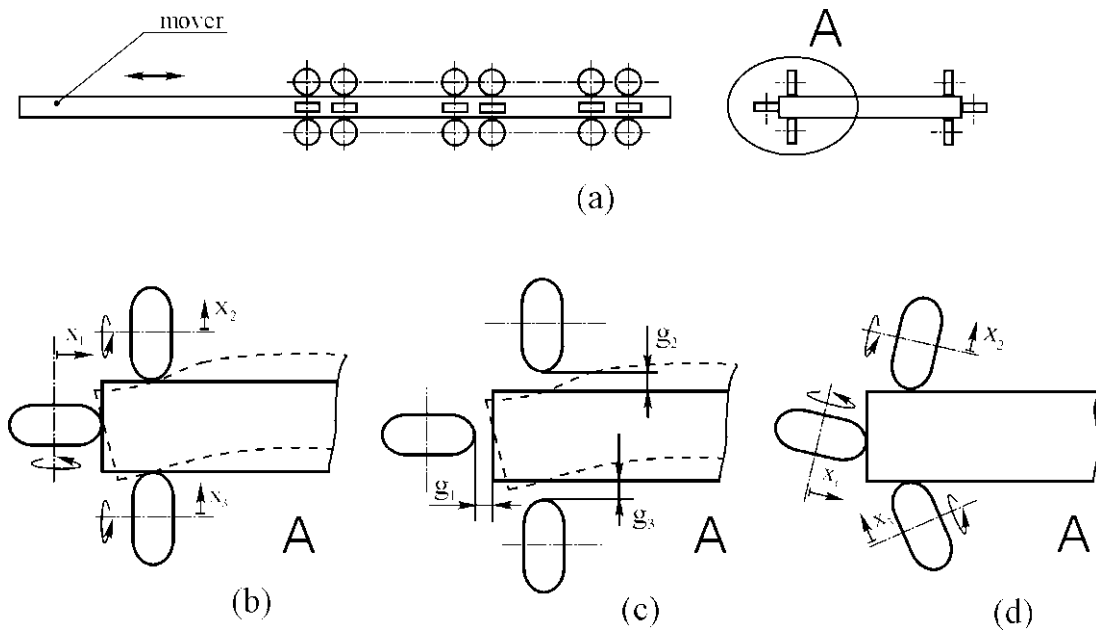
(a) Mover and cam follower bearings, (b) rectilinear degrees of freedom x_1 , x_2 , and x_3 of three cam follower bearings, (c) adjustable clearances g_1 , g_2 , and g_3 , (d) perpendicularity errors of the cam follower bearings.
